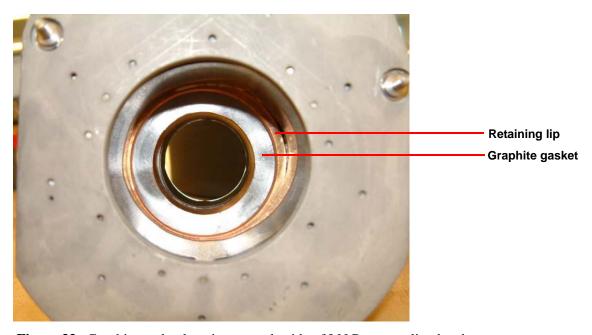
Graphite gasket location on underside of LN Pump cooling head.
